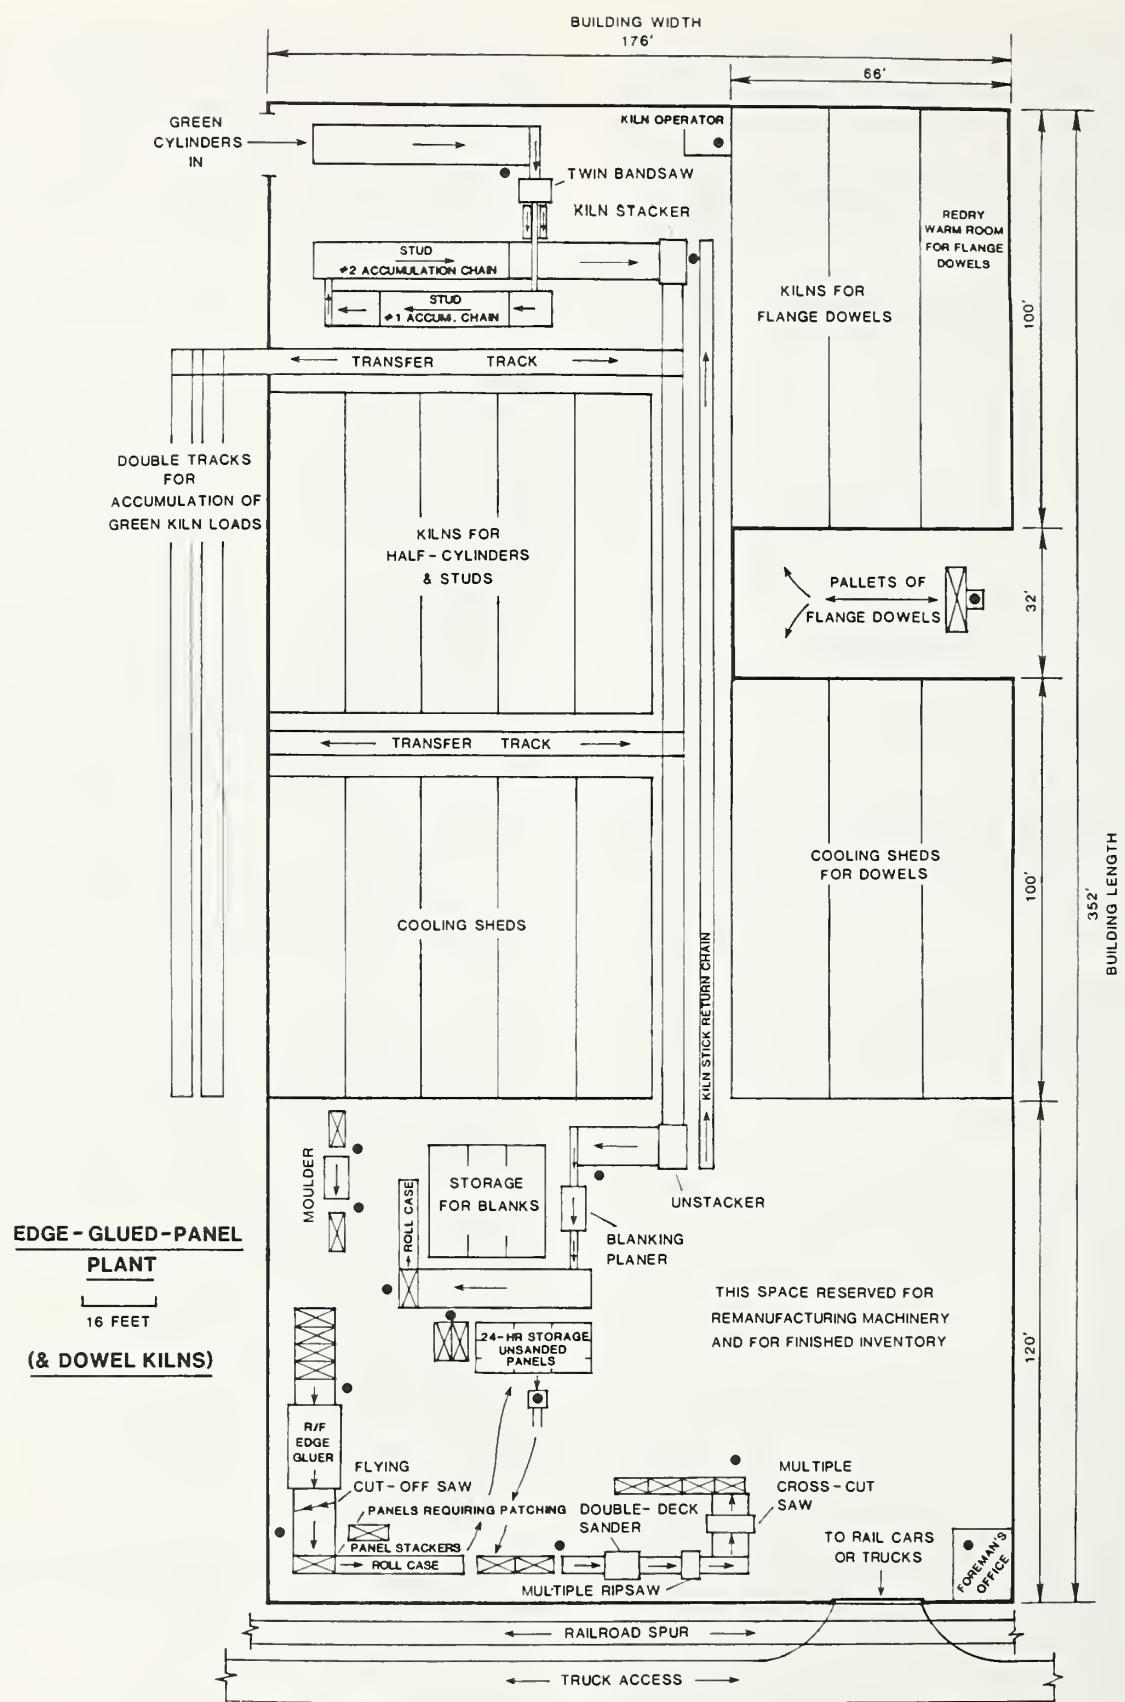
Layout of plant for manufacture of edge-glued panels, and arrangement of kilns and cooling sheds for flange dowels.
